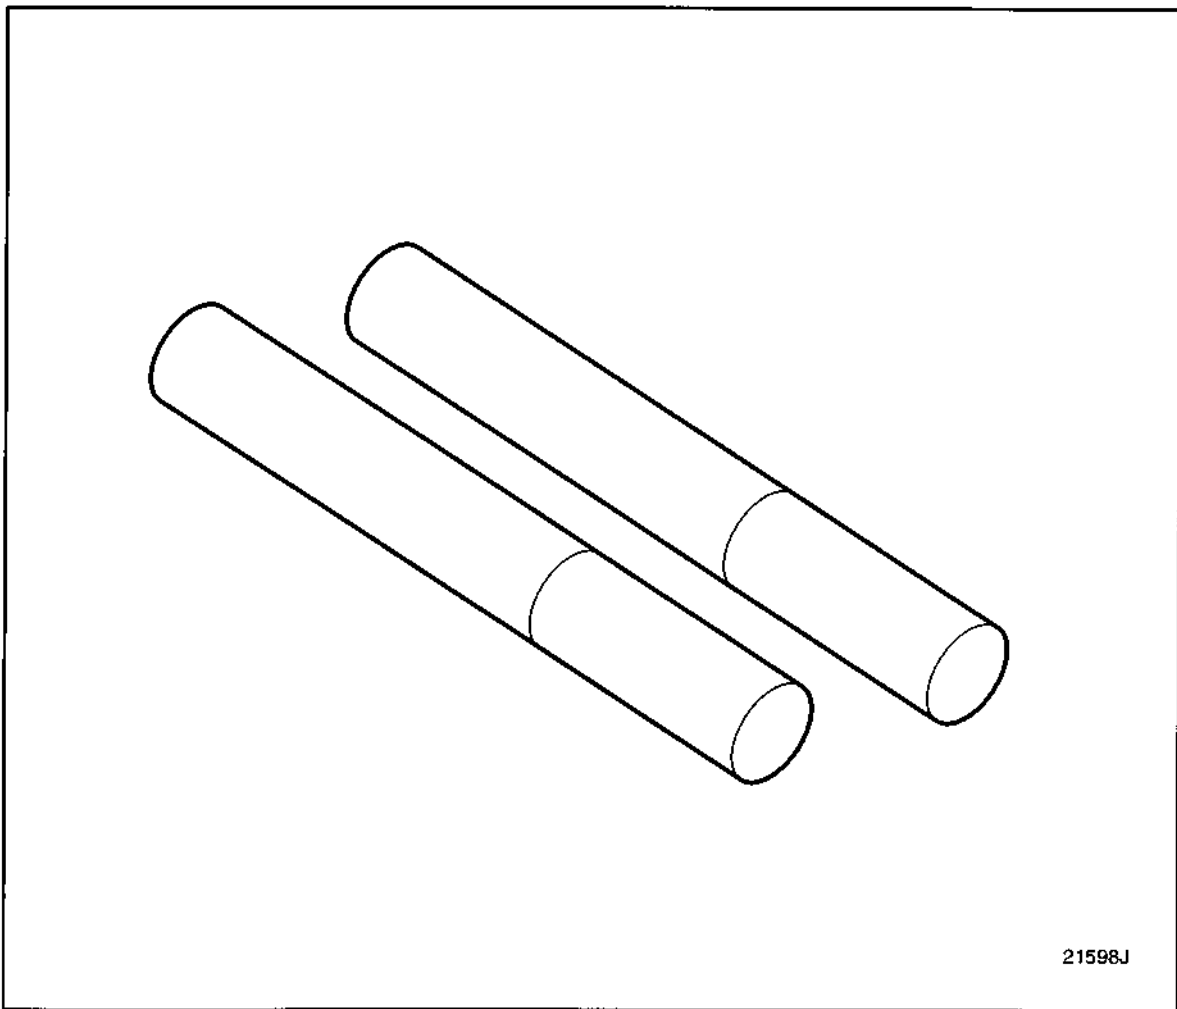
Connecting Rod Installation Guides,J 35945
